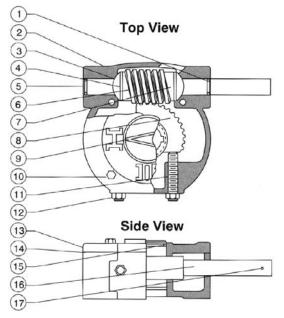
Internal view of quarter-turn wormgear operator. Numbered parts are as follows: (1) seal-input shaft, (2) housing, (3) bearing, (4) washer, (5) plug, (6) worm gear, (7) worm pin, (8) gear segment, (9) indicator cap, (10) cover bolt, (11) stop adjustable screw, (12) hex nut, (13) cover, (14) gasket cover, (15) O-ring, (16) worm shaft, (17) roll pin. (*Courtesy of Flowseal, a unit of the Crane Valve Group*)
